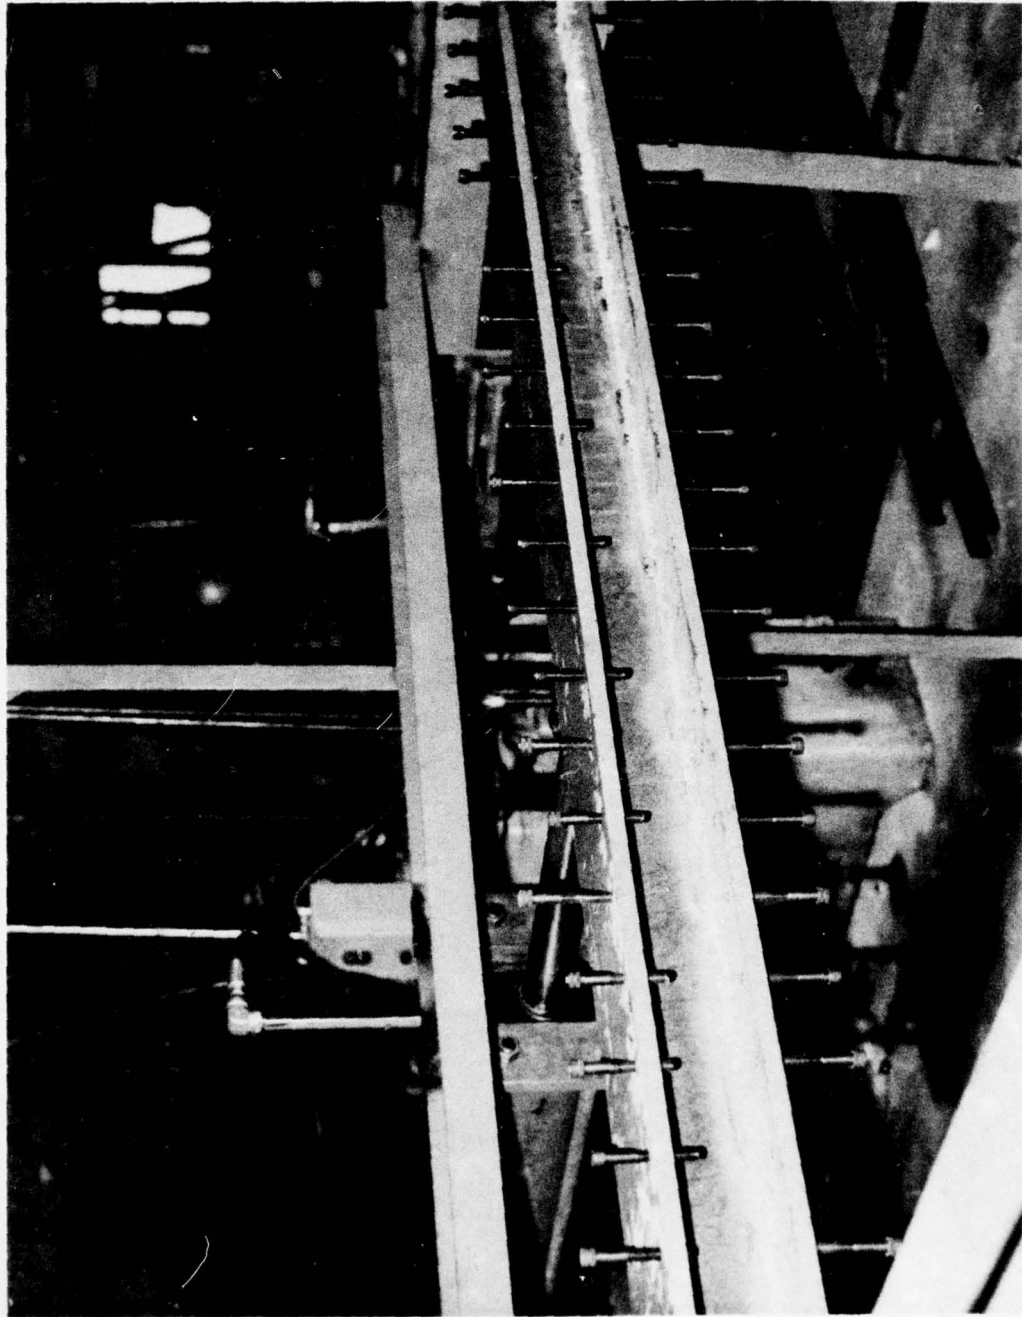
Push/Pull Unit Shaving End That Mates with Part
